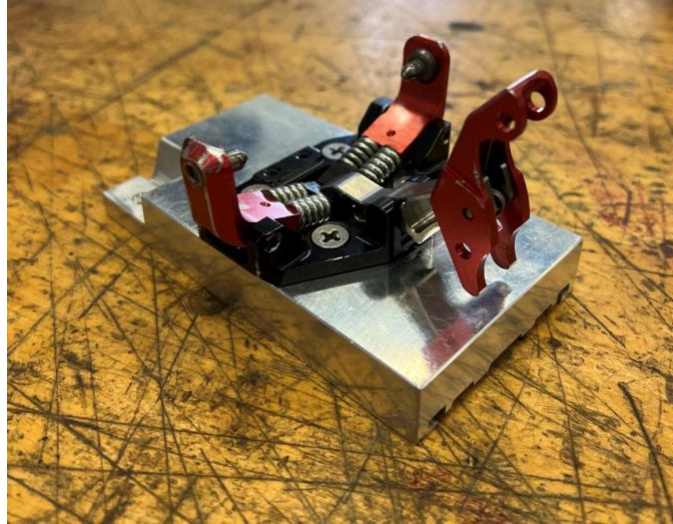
Tech Toe Piece Securely Bolted to Tech Toe Plate
